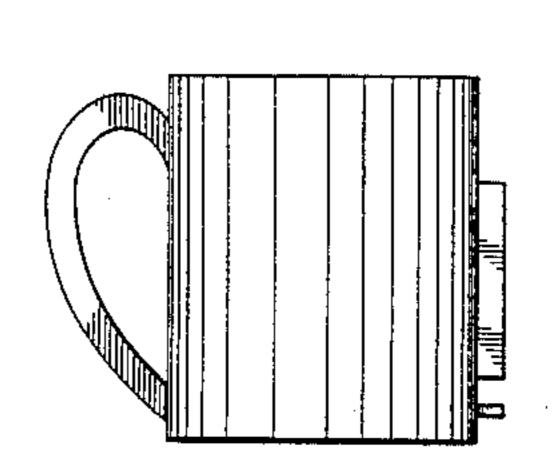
is a front-elevational view of a second embodiment of a cup with a spoon holder having a channel showing my new design, the rear being a mirror image thereof;
